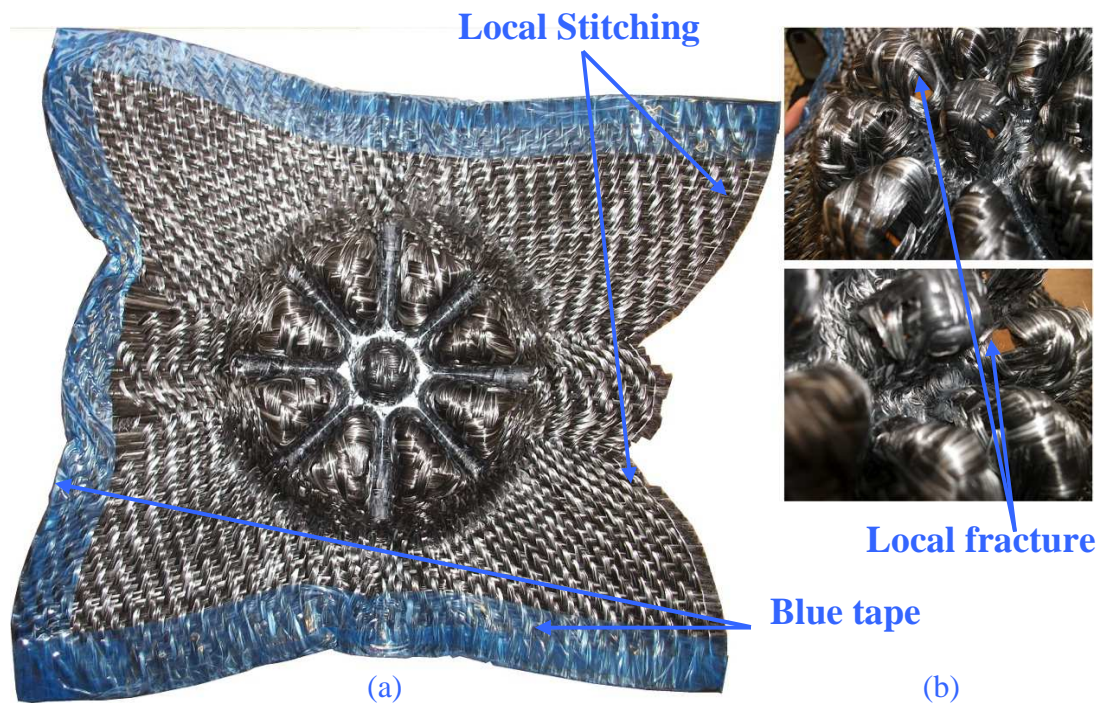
(a) Formed part with tapering and local stitching (b) local fracture and opening of the formed part
